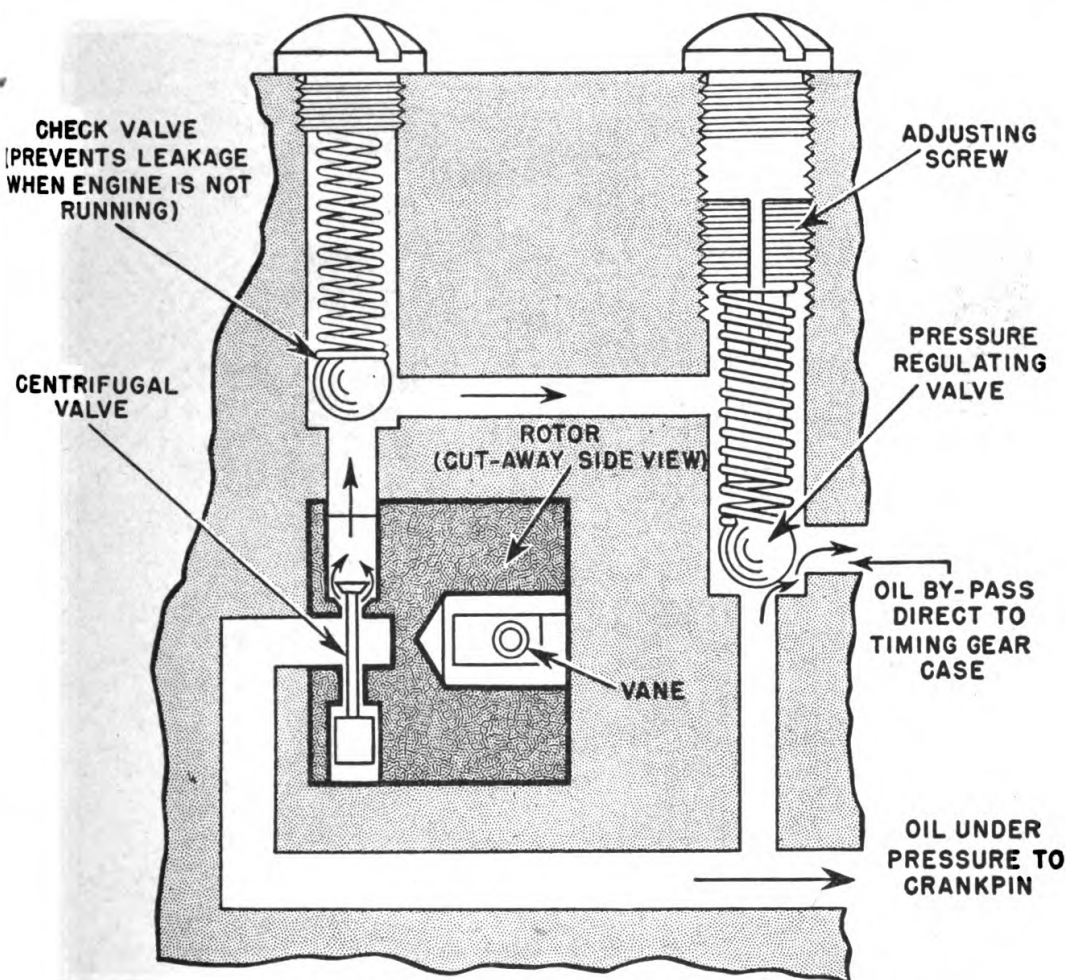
Centrifugal valve in feed pump rotor for regulating oil pressure.
